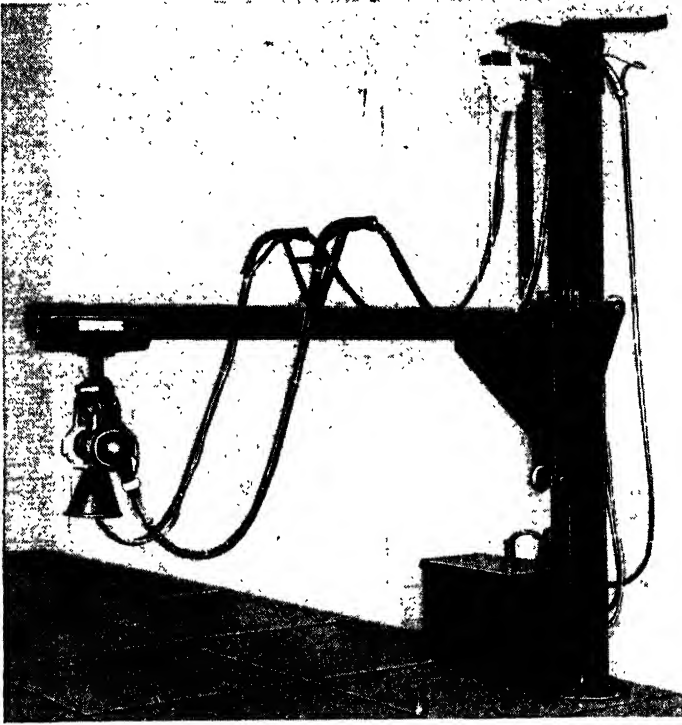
21. A 250-kv industrial X-ray unit mounted on a jib-crane tube stand. (Courtesy Westinghouse Electric Corporation.)
